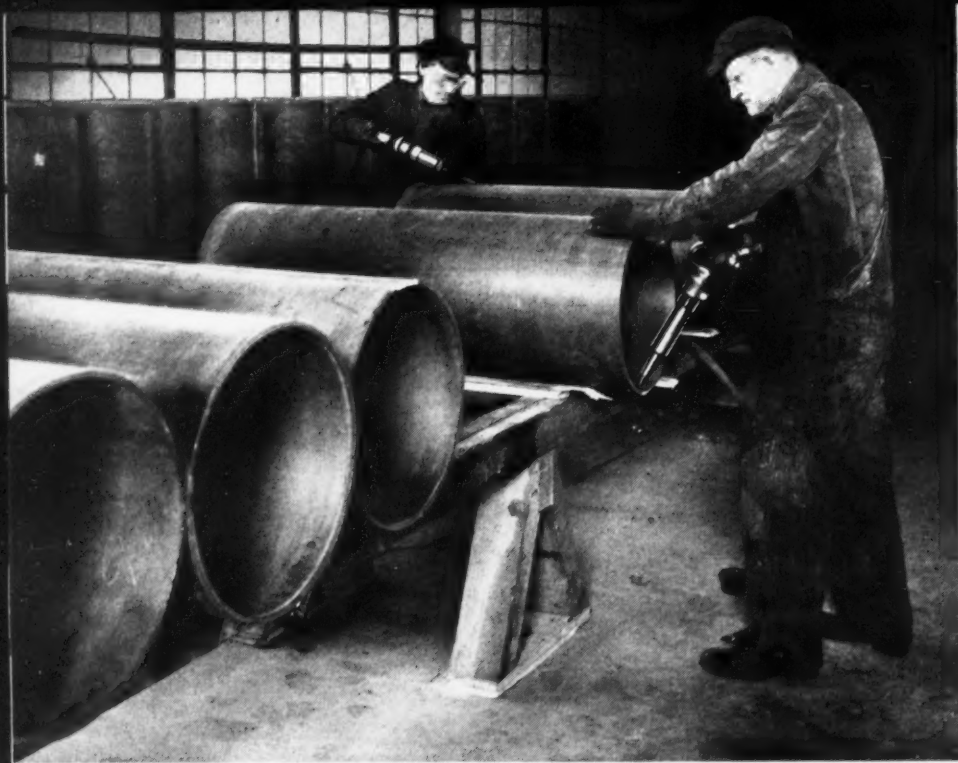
(Left) The Weld Metal is Chipped Flat on Both the Inside and Outside of the Bombs and at Both Ends
